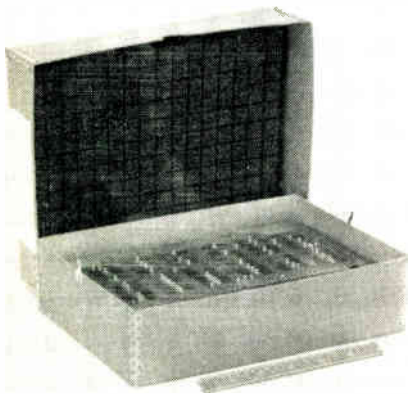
This metal-stayed box holds the circuit boards during assembly. Diced polyurethane pad mounted in cover holds loose components in place prior to soldering.
